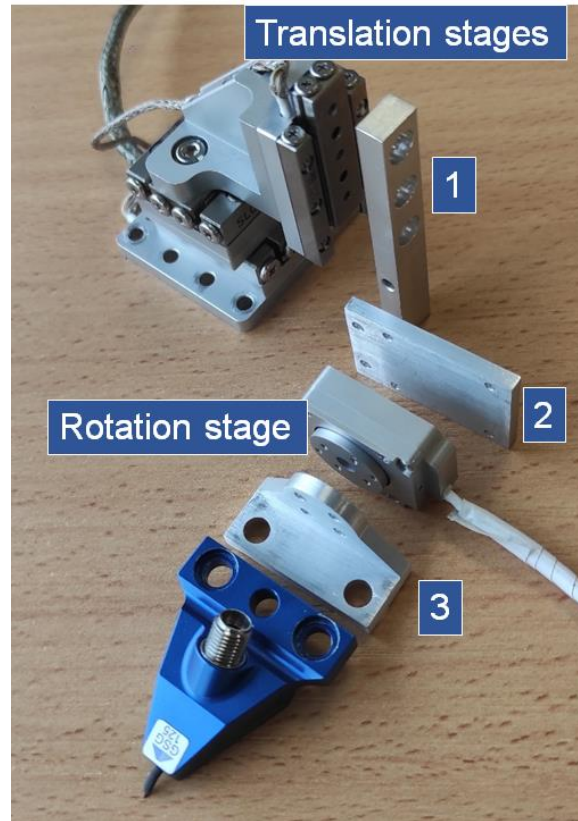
1<sup>st</sup> piece attached to the Z stage, 2<sup>nd</sup> piece attaching the 1st piece to the rotation stage, 3<sup>rd</sup> piece attaching the rotation stage to the probe
